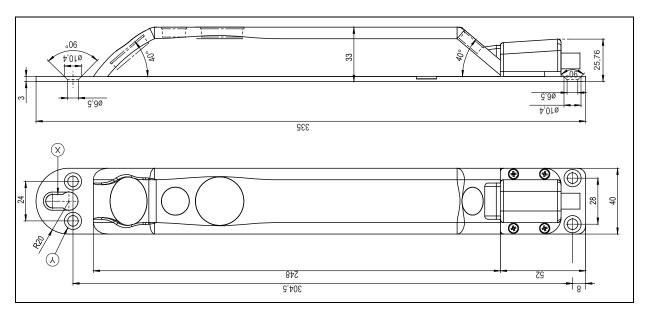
Dimensions air-ultrasonic sensor, type OCL
